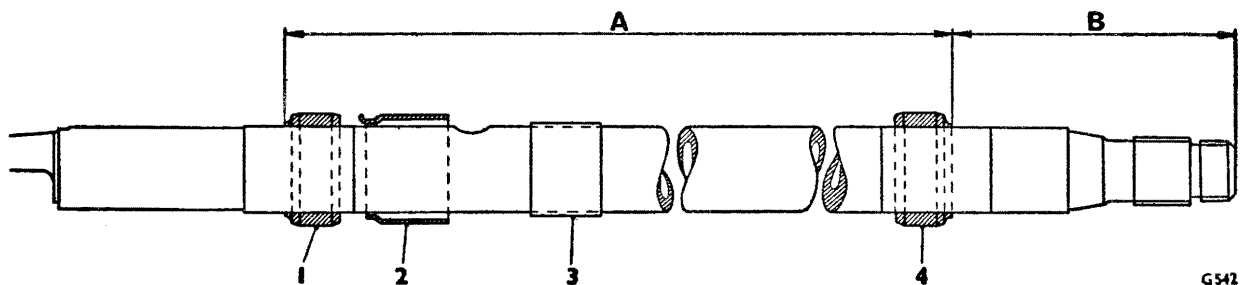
ASSEMBLY OF INNER STEERING TUBE
